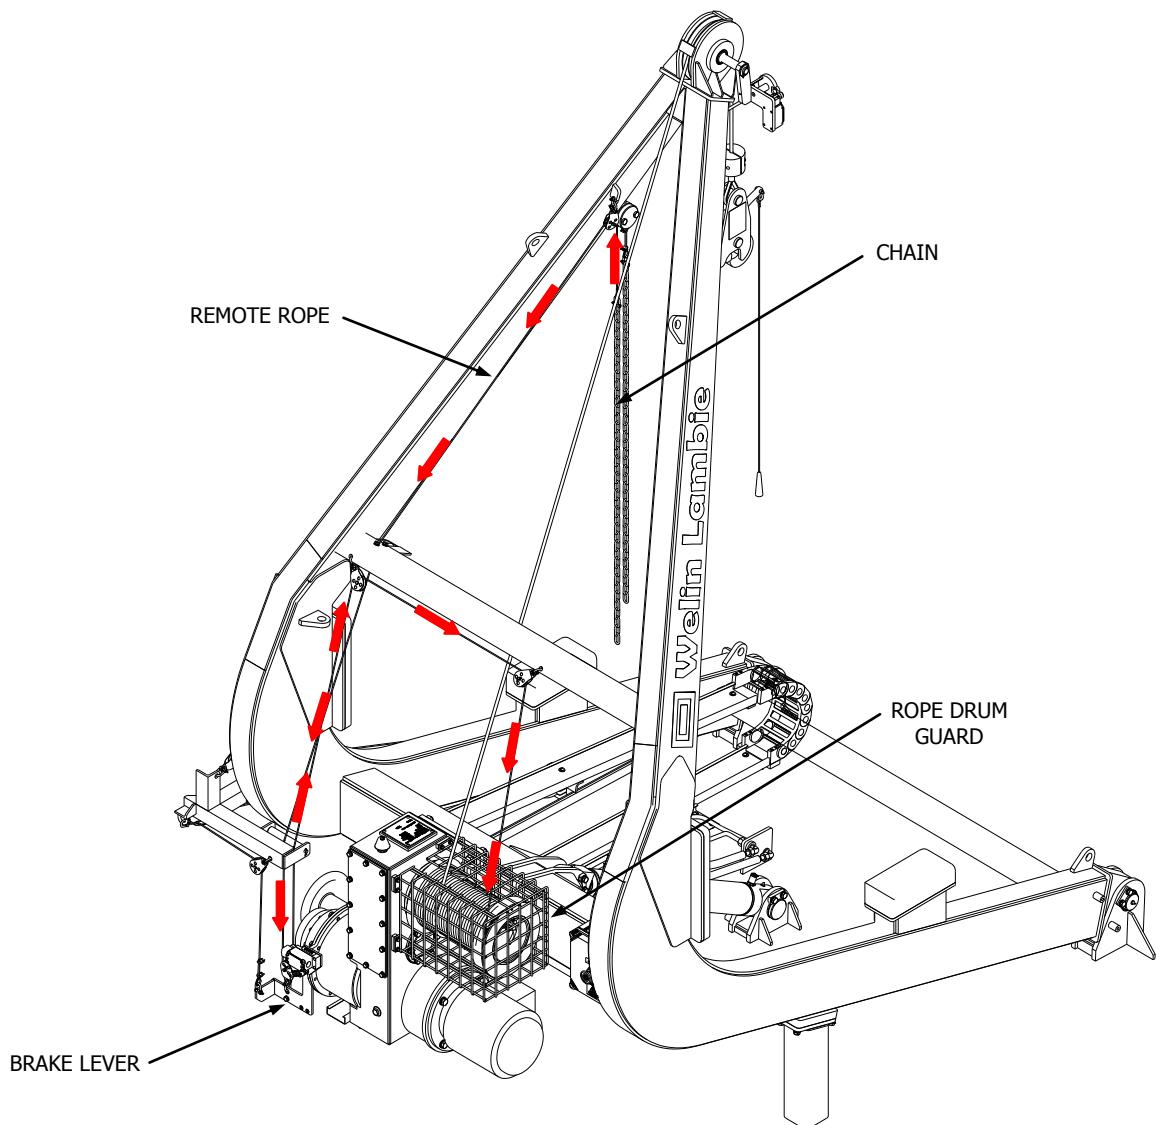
Reeving Remote Brake Control Rope – Boat
